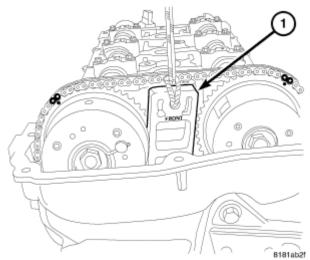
WEDGE TOOL 9701 Courtesy of CHRYSLER LLC
